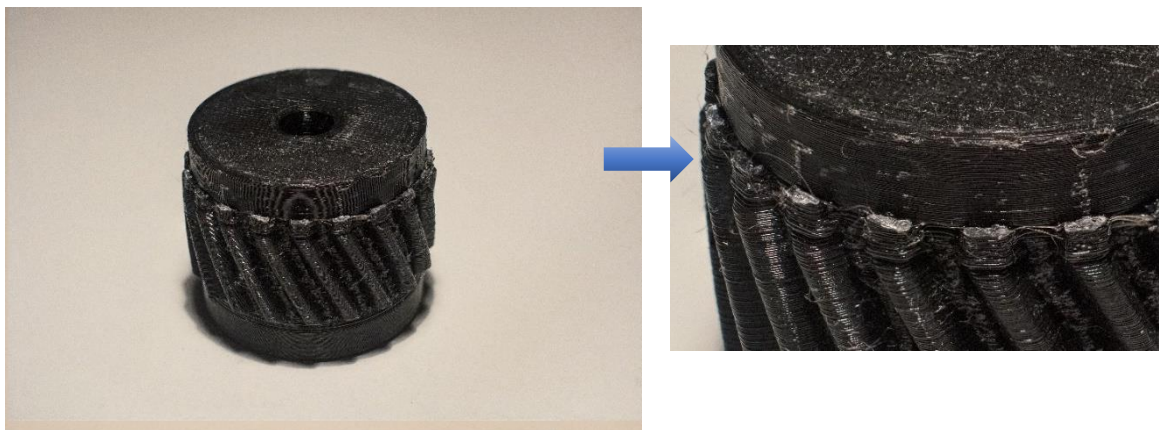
First printing of a gear wheel, without the manufacturing fixes for FDM, and detail of the support structures in the grooves
